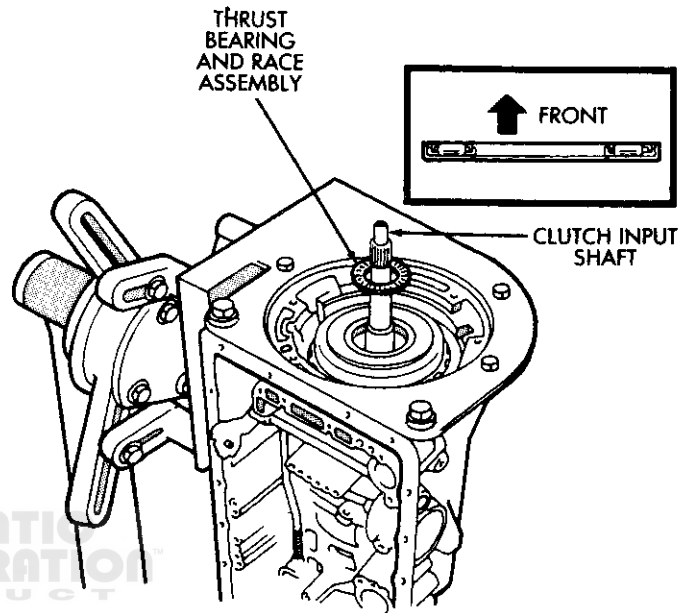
Installing Input Shaft Thrust Bearing And Race Assembly
